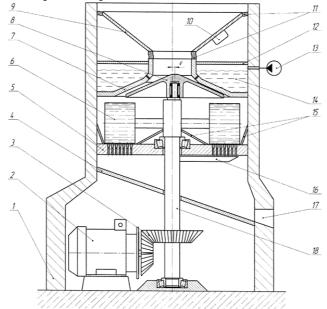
Device for preliminary compaction of fibrous materials. 1-body; 2-motor; 3-mechanical transmission; 4-inclined table; 5-disk array; 6-rollers; 7-outer fixed cone; 8-internal movable cone; 9-hopper; 10-high-frequency generator; 11-elastic element; 12-encapsulate id; 13-feeding pump; 14-tank; 15-inclined bead; 16-knife; 17-discharge port; 18-shaft.
